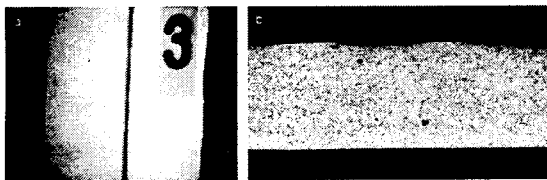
X-ray radiograph(a) and longitudinal cross section of aluminized steel laser weld(b)
